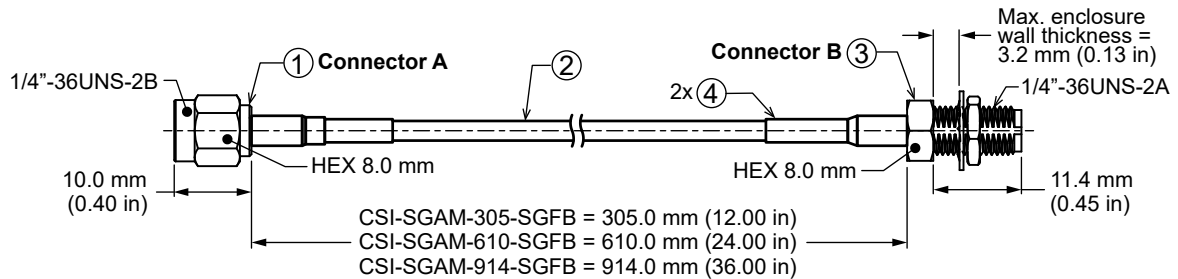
Product Dimensions for the CSE-SGAM-ccc-SGFB Cable Assembly
